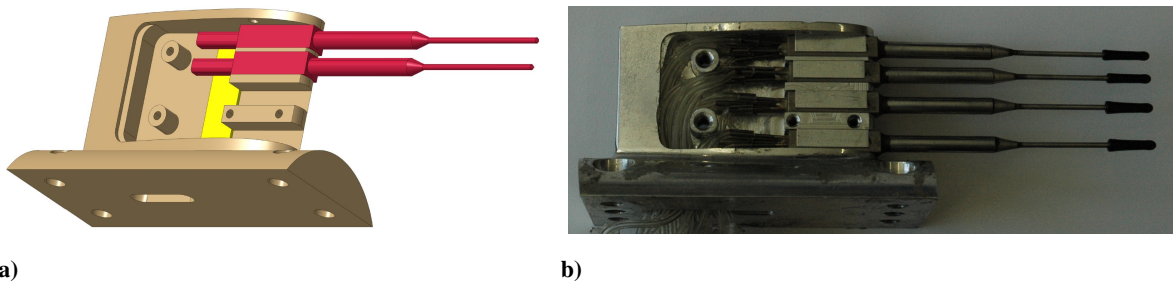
a) CAD presentation of measurement rake including five hole probes b) measurement rake including five hole probes.
